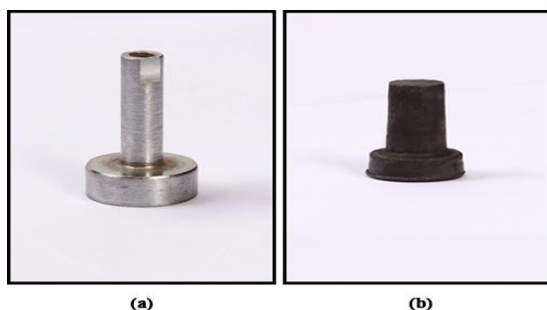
(a) The final part of the brake's output shaft after machining; (b) The final part of the brake's output shaft after forging.
